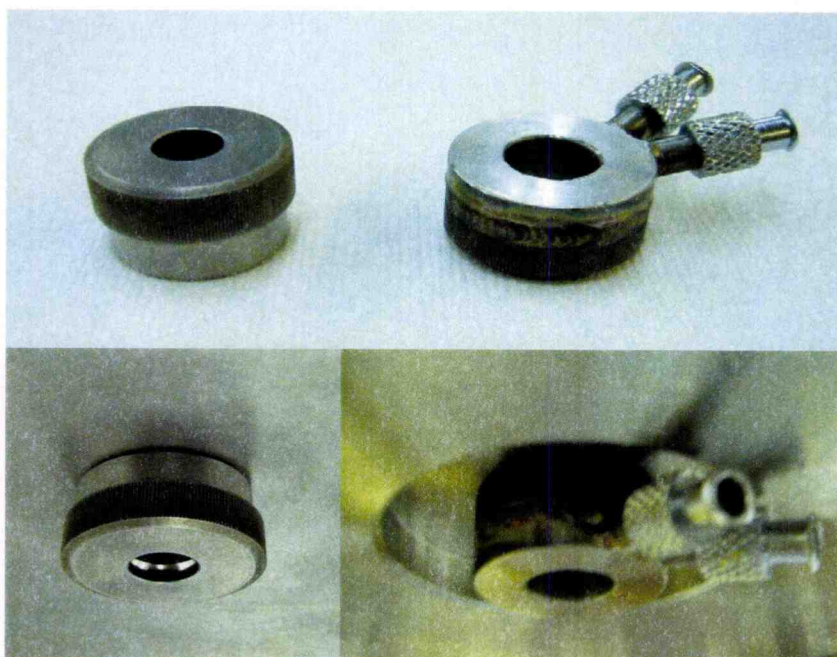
Picture of compression port that provided a vacuum seal between the vacuum chamber and the quartz barrel. The port on the right has been reduced in height, and a cooling manifold has been welded on.
